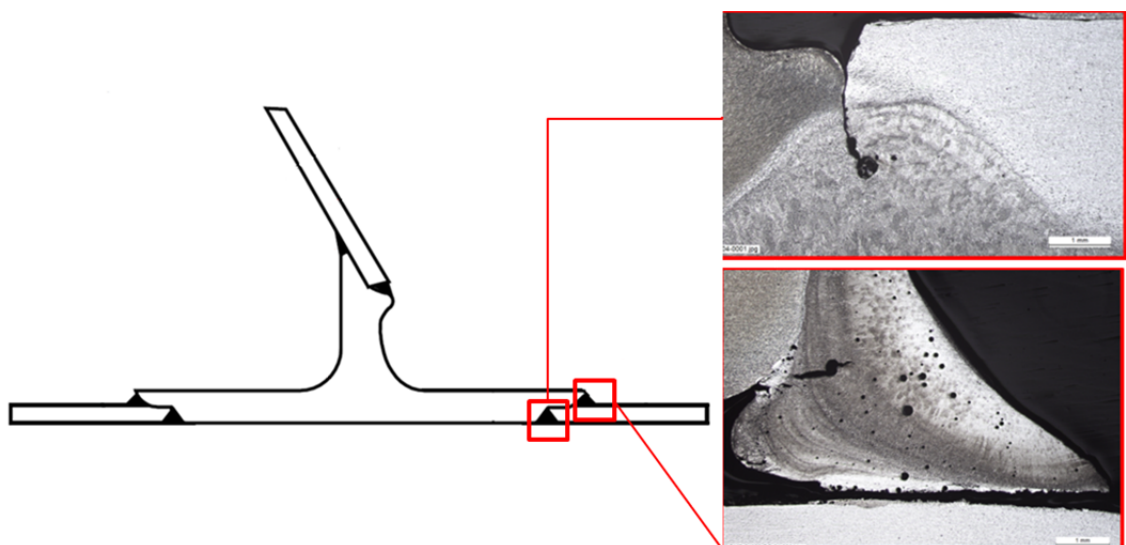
Images of sample RO-04. On the right images, the scale bars indicate 1.0mm length. The top right image shows the lack of root fusion defect, and the right frame shows the fracture between the internal fillet weld and the inner surface of the tanker shell along the fusion line.
